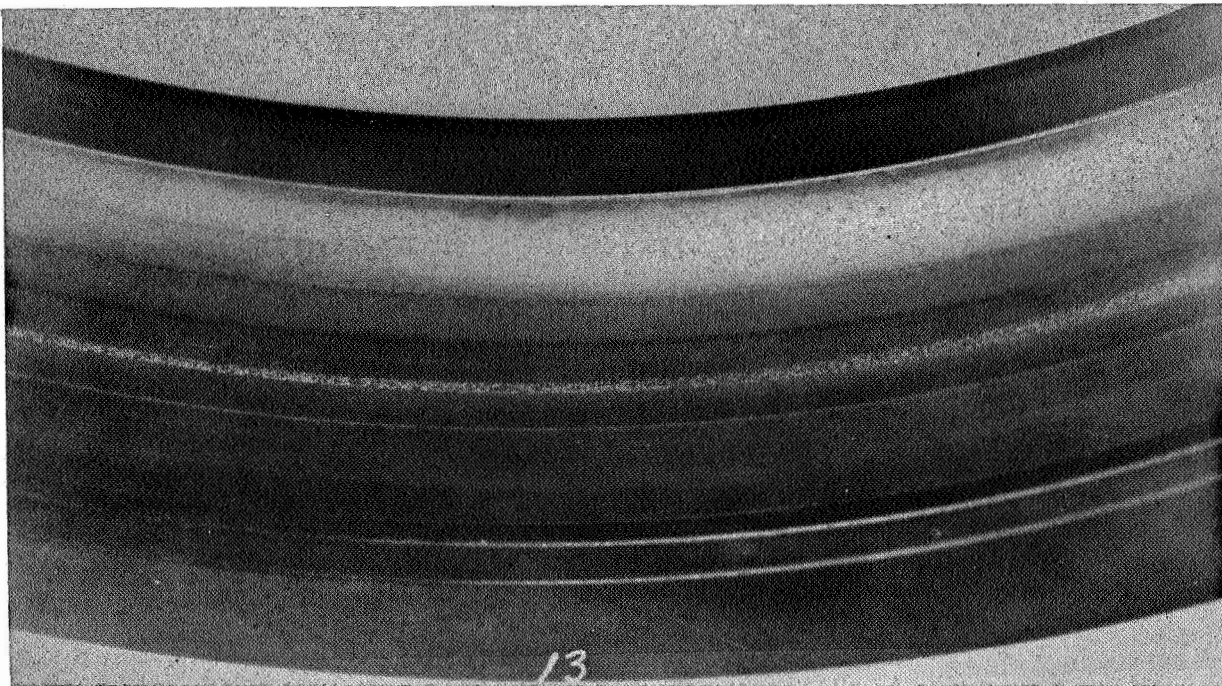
, OUTER RING BALL PATH - BEARING S/N 13
